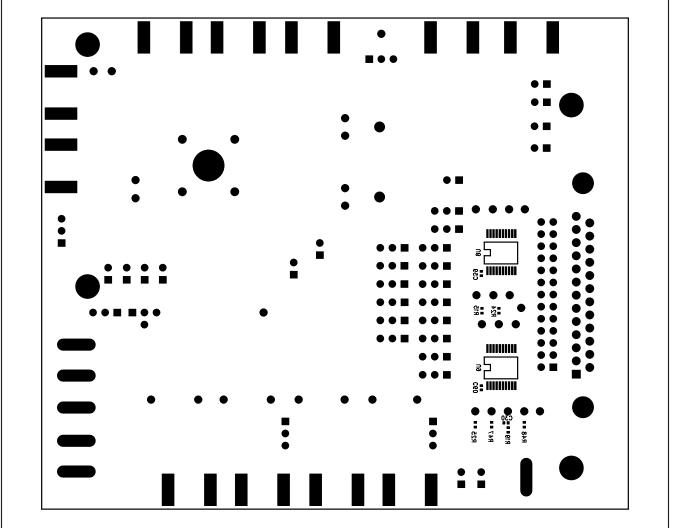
MAX2839 EV Kit PCB Layout—Bottom Silkscreen
